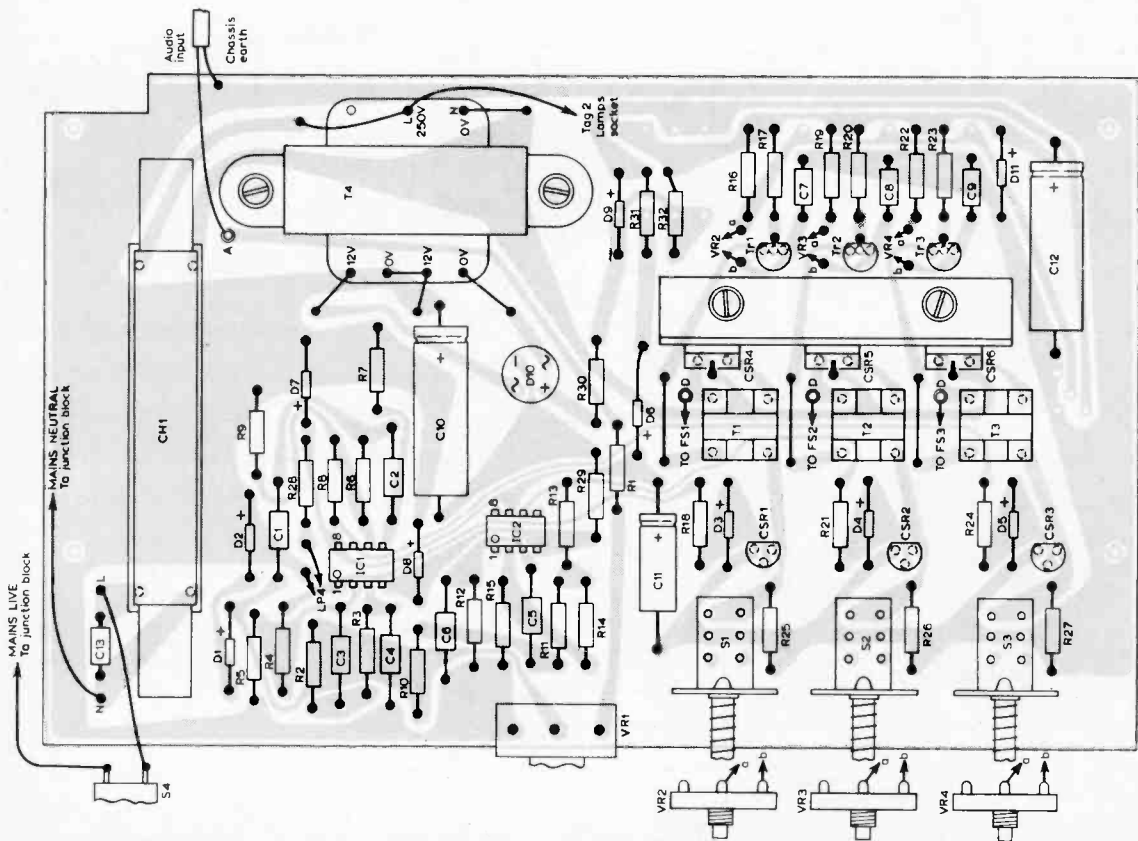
Component layout for the lamp dimming version of the P.W. Tricolour on the Mk II printed circuit board. Refer to the April and June 73 issues for component details.
